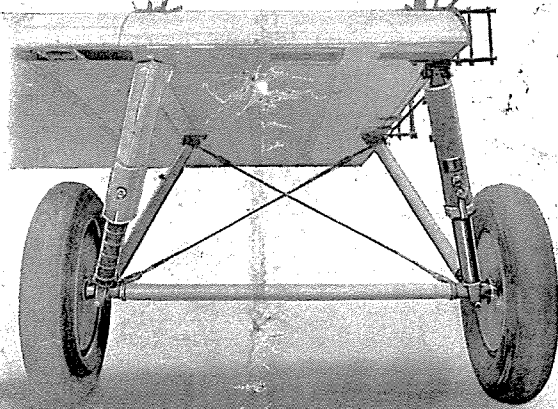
Vickers Oleo-Pneumatic Chassis.
